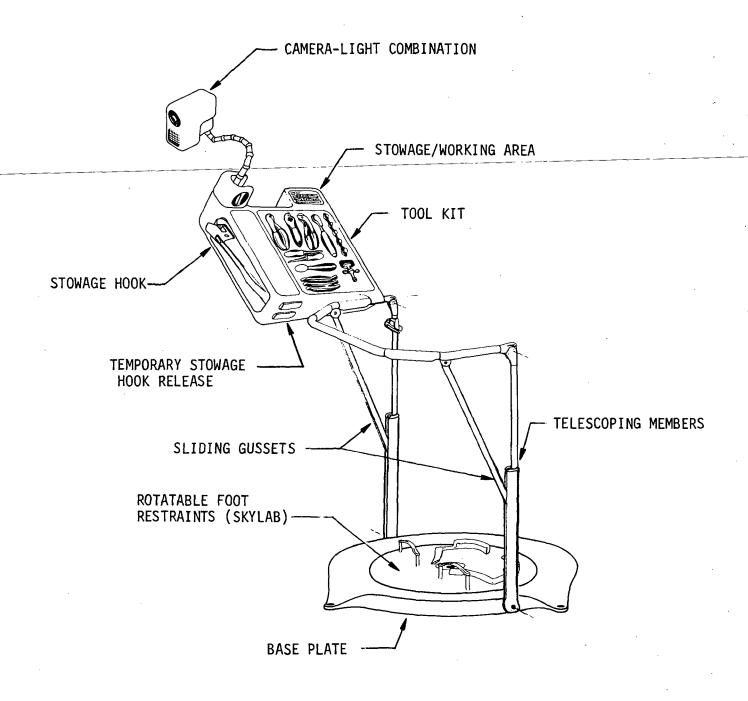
SECOND ALTERNATE CONCEPT - NO. 3 WORKSTATION
